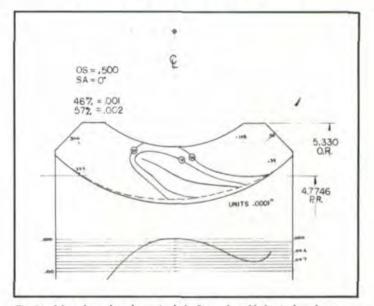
Map of one thread oversize hob. Seven thread hob, six thread worm.
